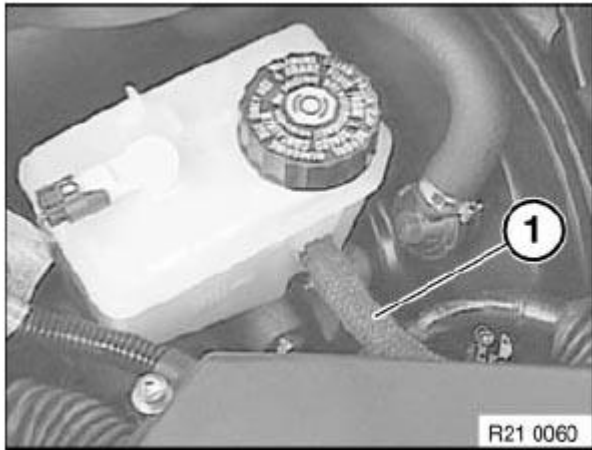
Identifying Supply Hose Of Clutch Hydraulic System
